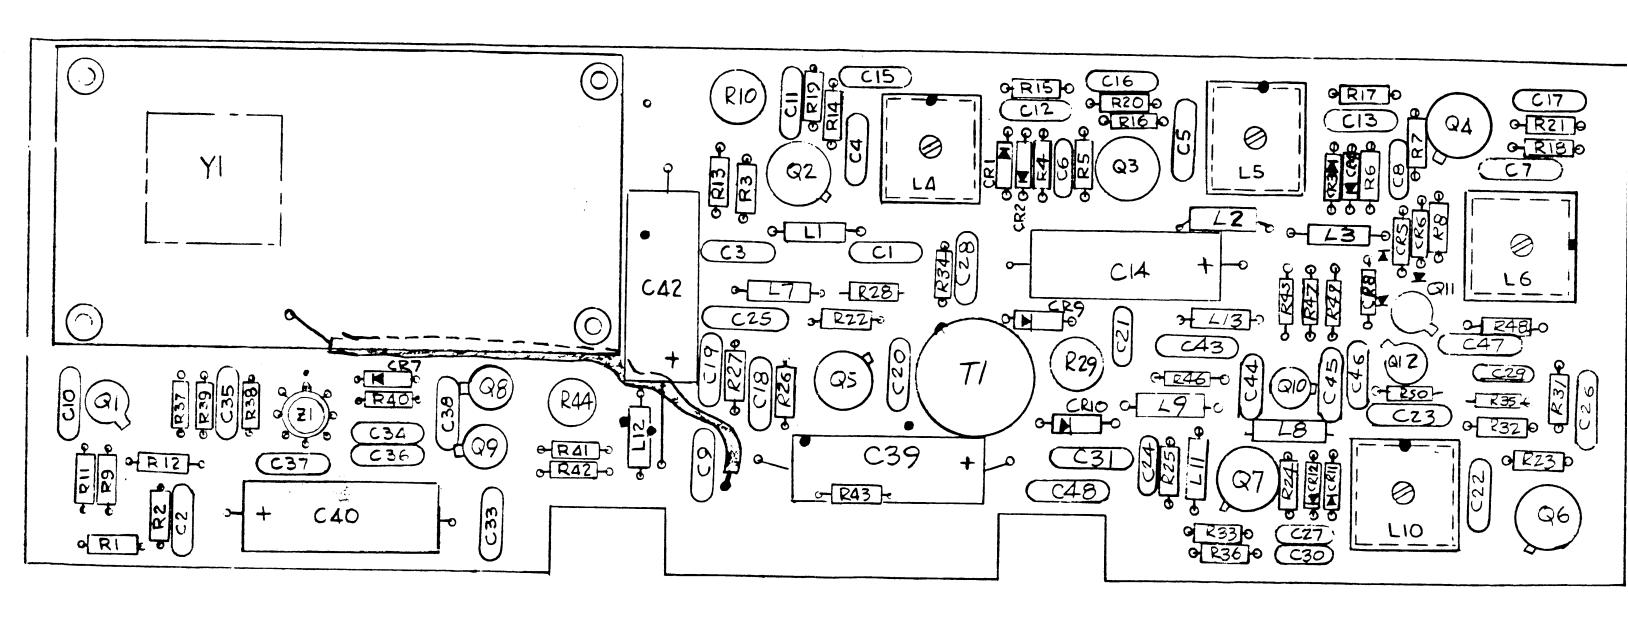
Sync/AFC Assembly Z117, Location of Components
